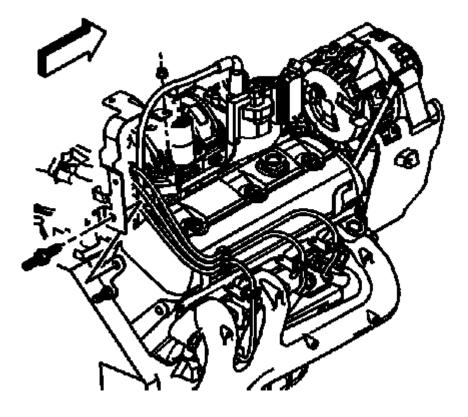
View Of Engine Wiring Harness Rear Bracket Nut Courtesy of GENERAL MOTORS CORP.
